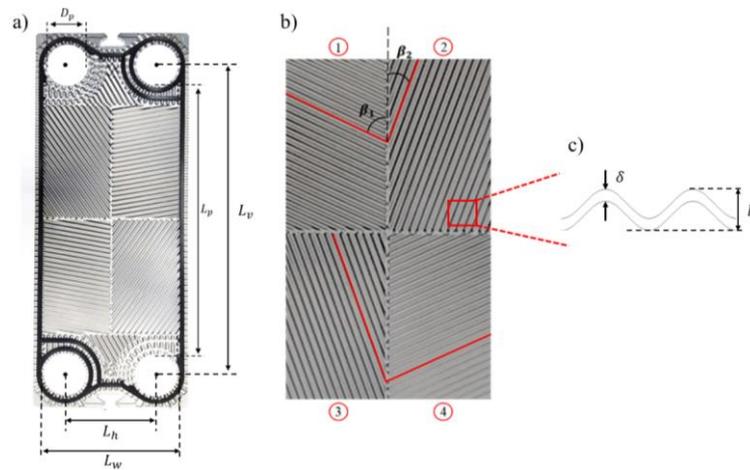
Four-quadrant corrugated plate: a) complete plate, and b) angle of the corrugations. Source: Adapted from Strobel (2023).
